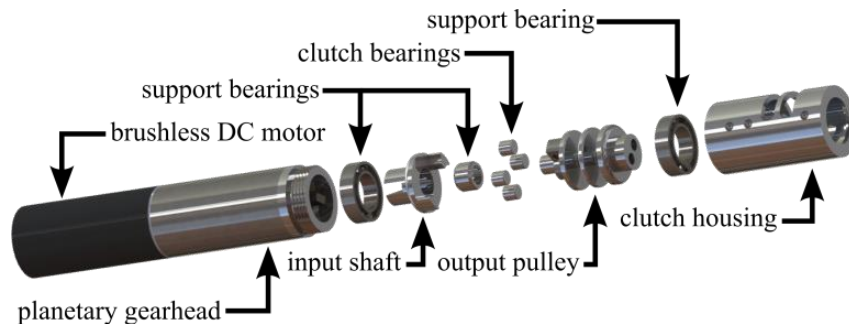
Exploded view of motor unit, including clutch and pulley.
